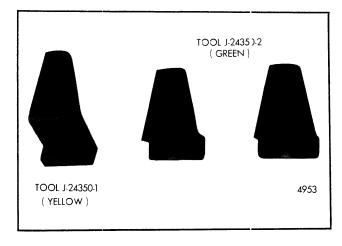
Glass Alignment Gauge Blocks - Tool J-24350 (Consists of a Set of Three Blocks)
